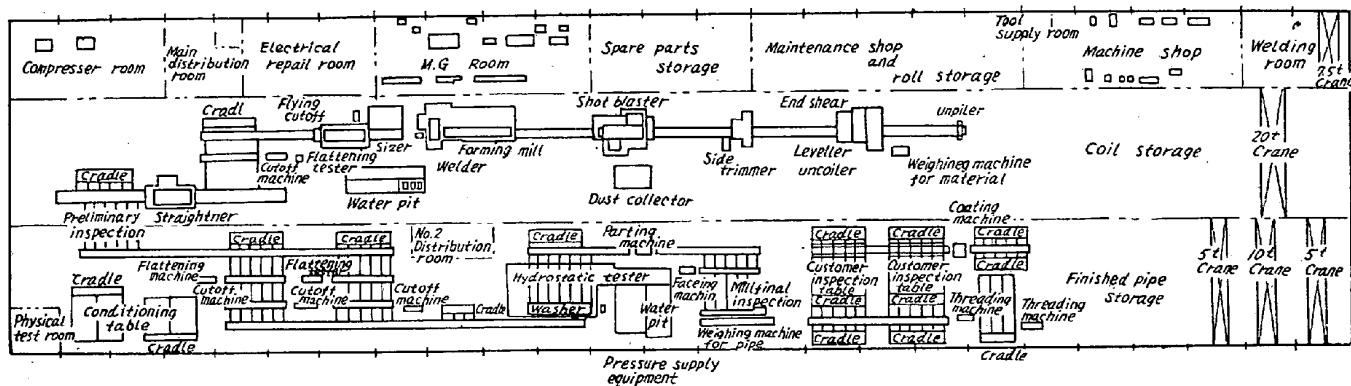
Mill layout for large electric resistance welded steel pipes.
